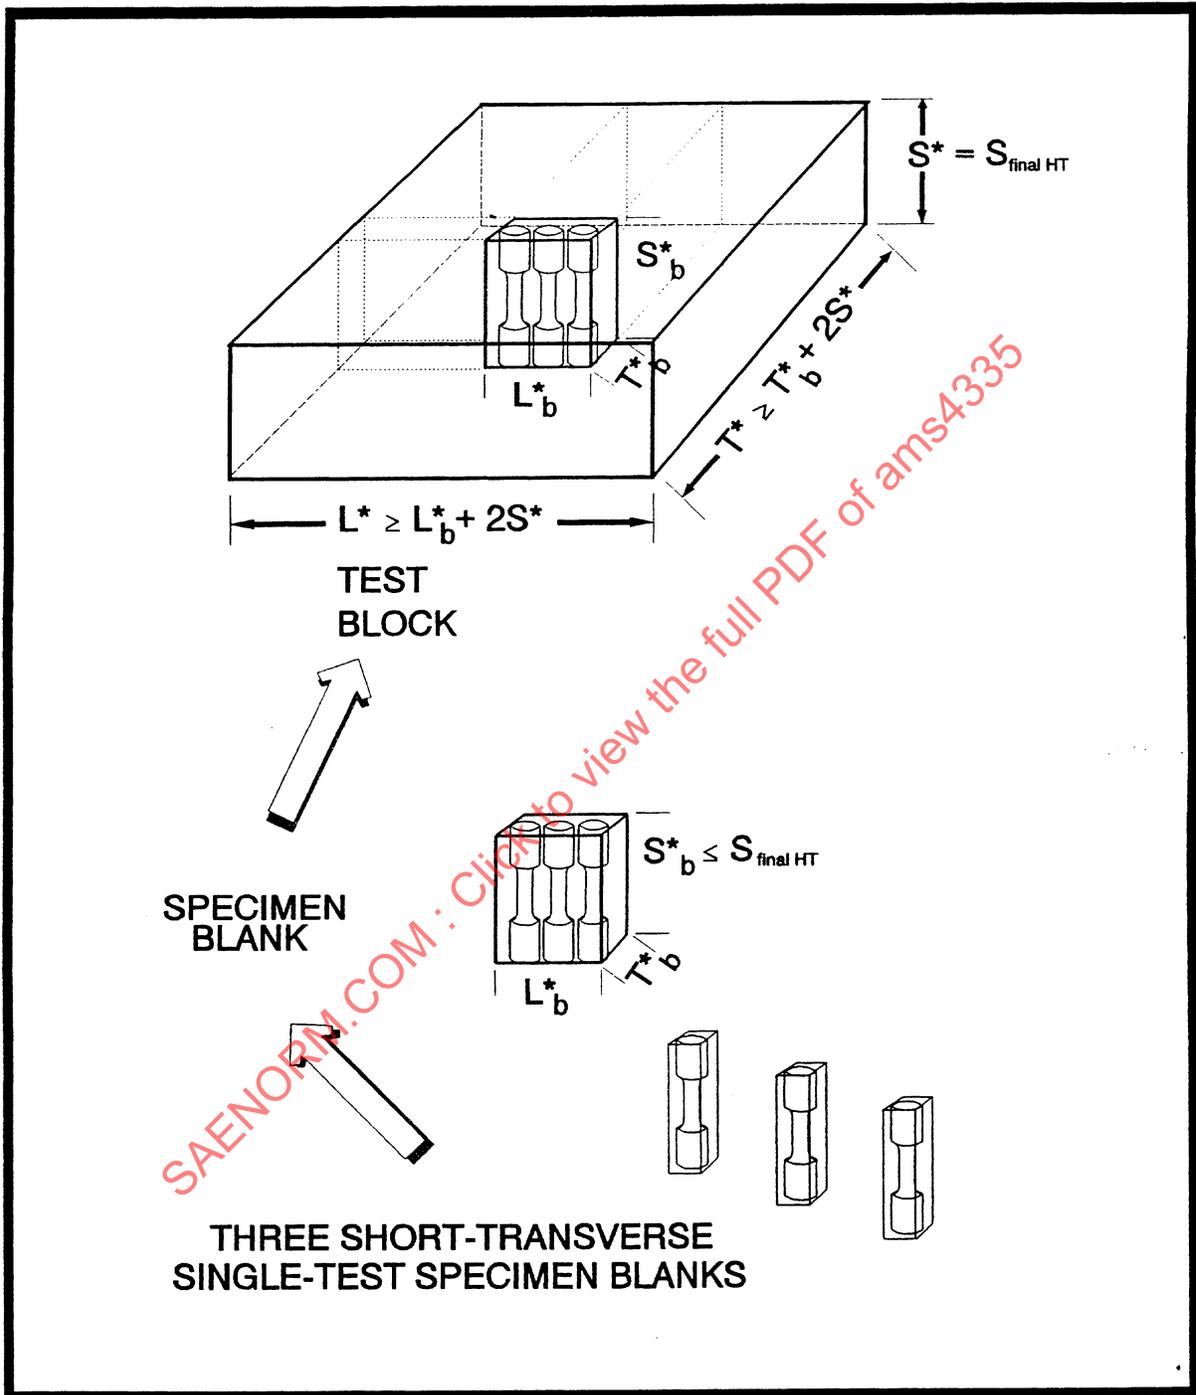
Short-Transverse Specimen Blank Design and Test Block Design
